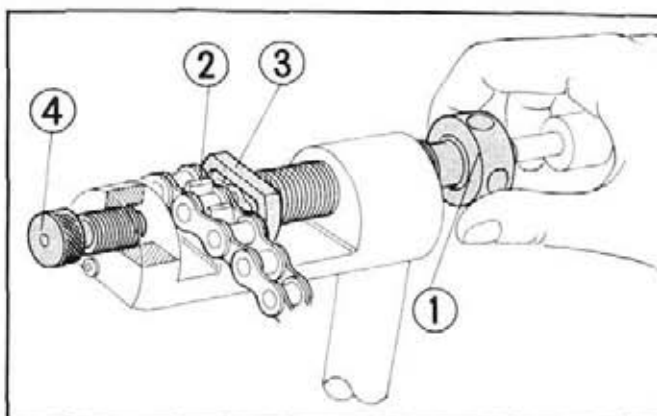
① Pressure bolt ③ Pressure holder
